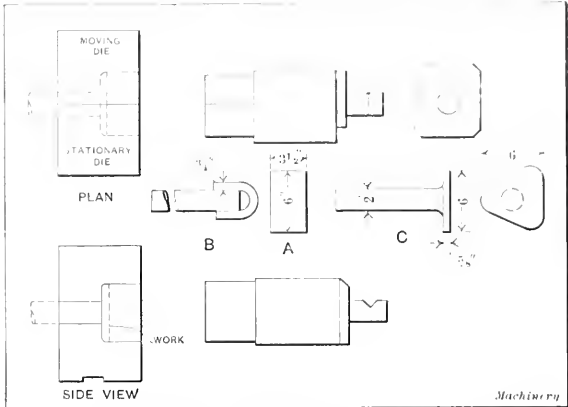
Forging Machine Dies and Tools for making a Car Float Stanchion Foot
